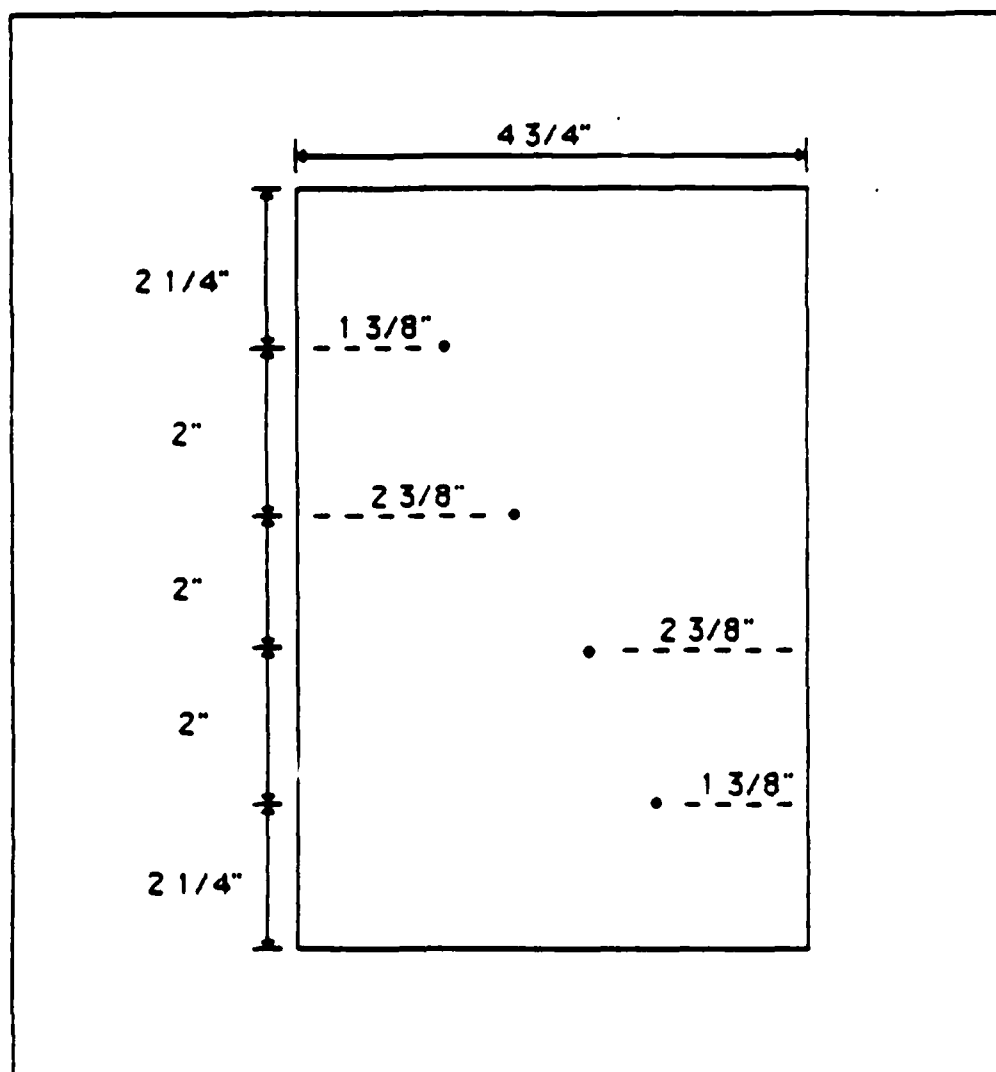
Top View of Hot/Cold Phenolic Surface Showing Thermocouple Placements
